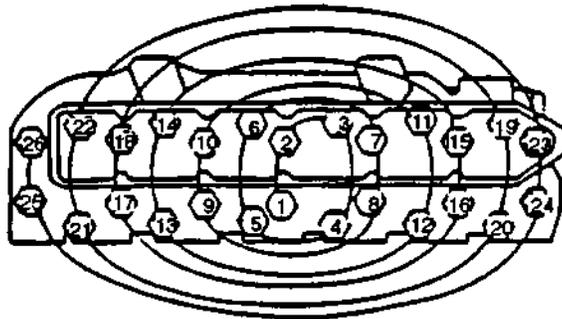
Cylinder Head Capscrew Tightening Sequence
